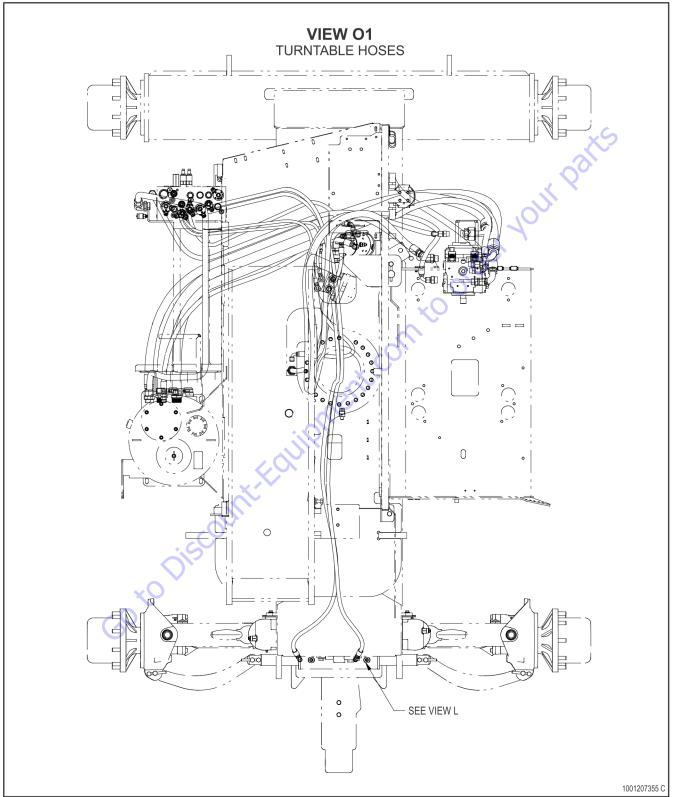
Hydraulics Installation - Sheet 14 of 28
